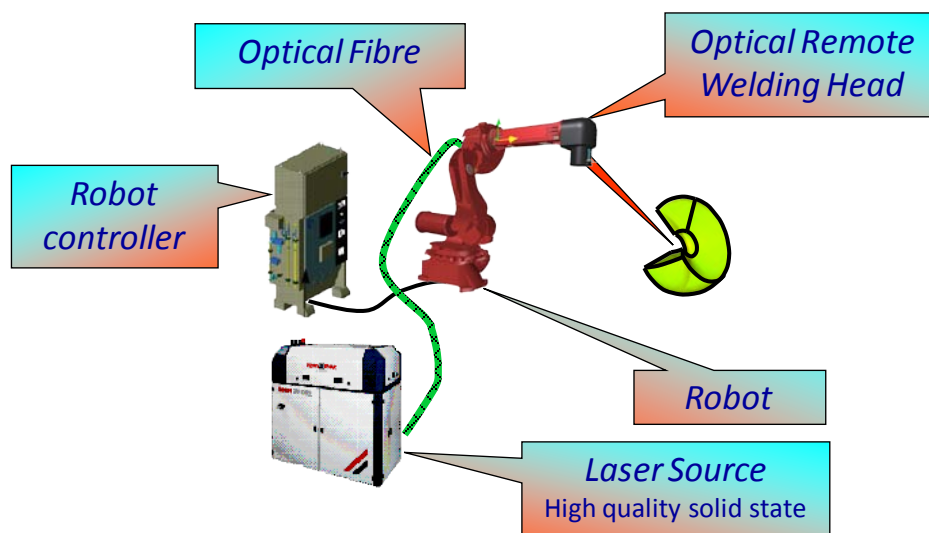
Equipment layout for Remote Laser Welding, excluding tooling (courtesy Comau S.p.a.)
